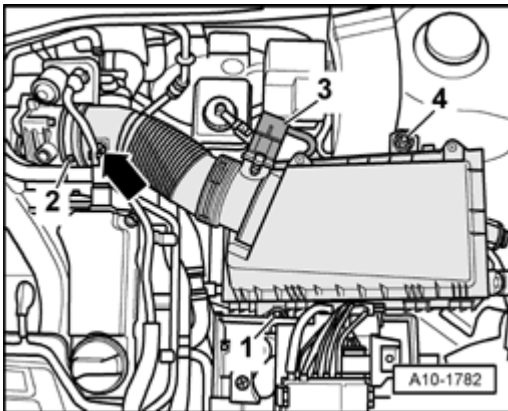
Identifying Air Hose, Mass Air Flow Sensor -G70- & Bolts
